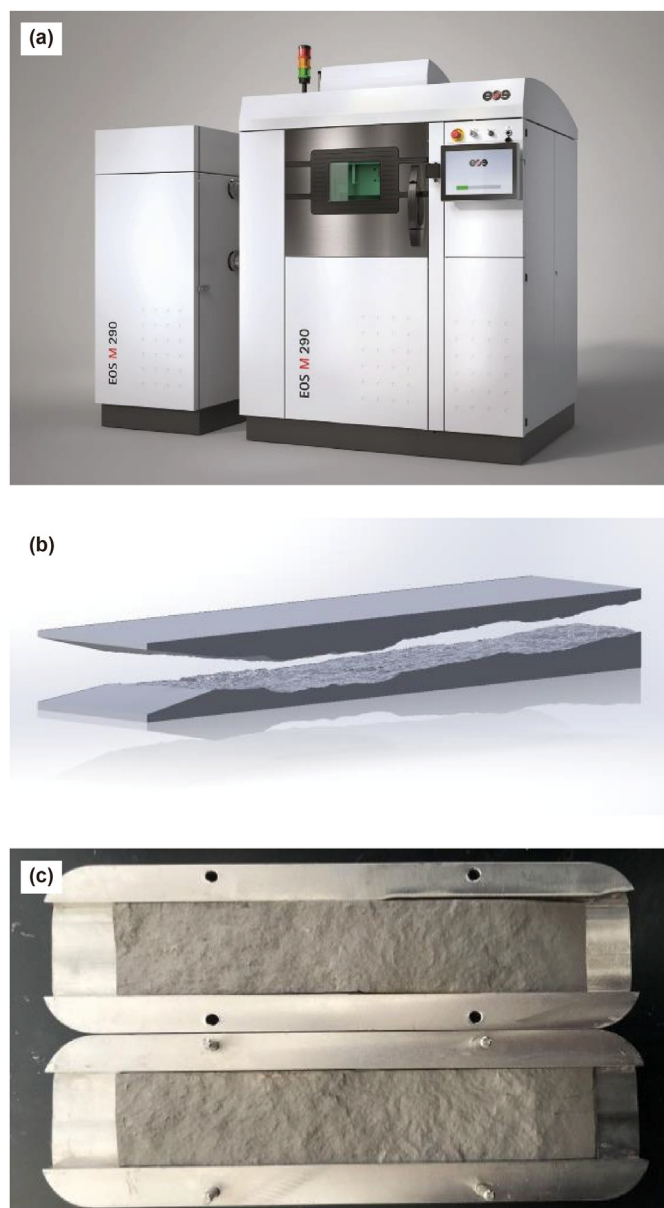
Artificial fracture model of hot dry rock. (a) EOS M 290 3D printer; (b) 3D-scanned fracture surface structure; and (c) 3D-printed artificial fracture model.
